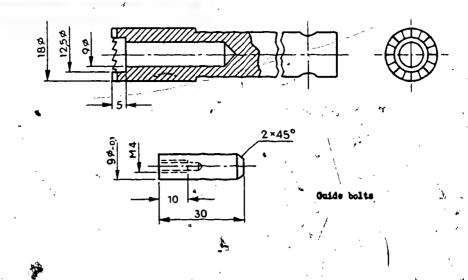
Diagram showing modification of miller EF 8488 E (1 687 910 006) and preparation of the corresponding guide bolt.
